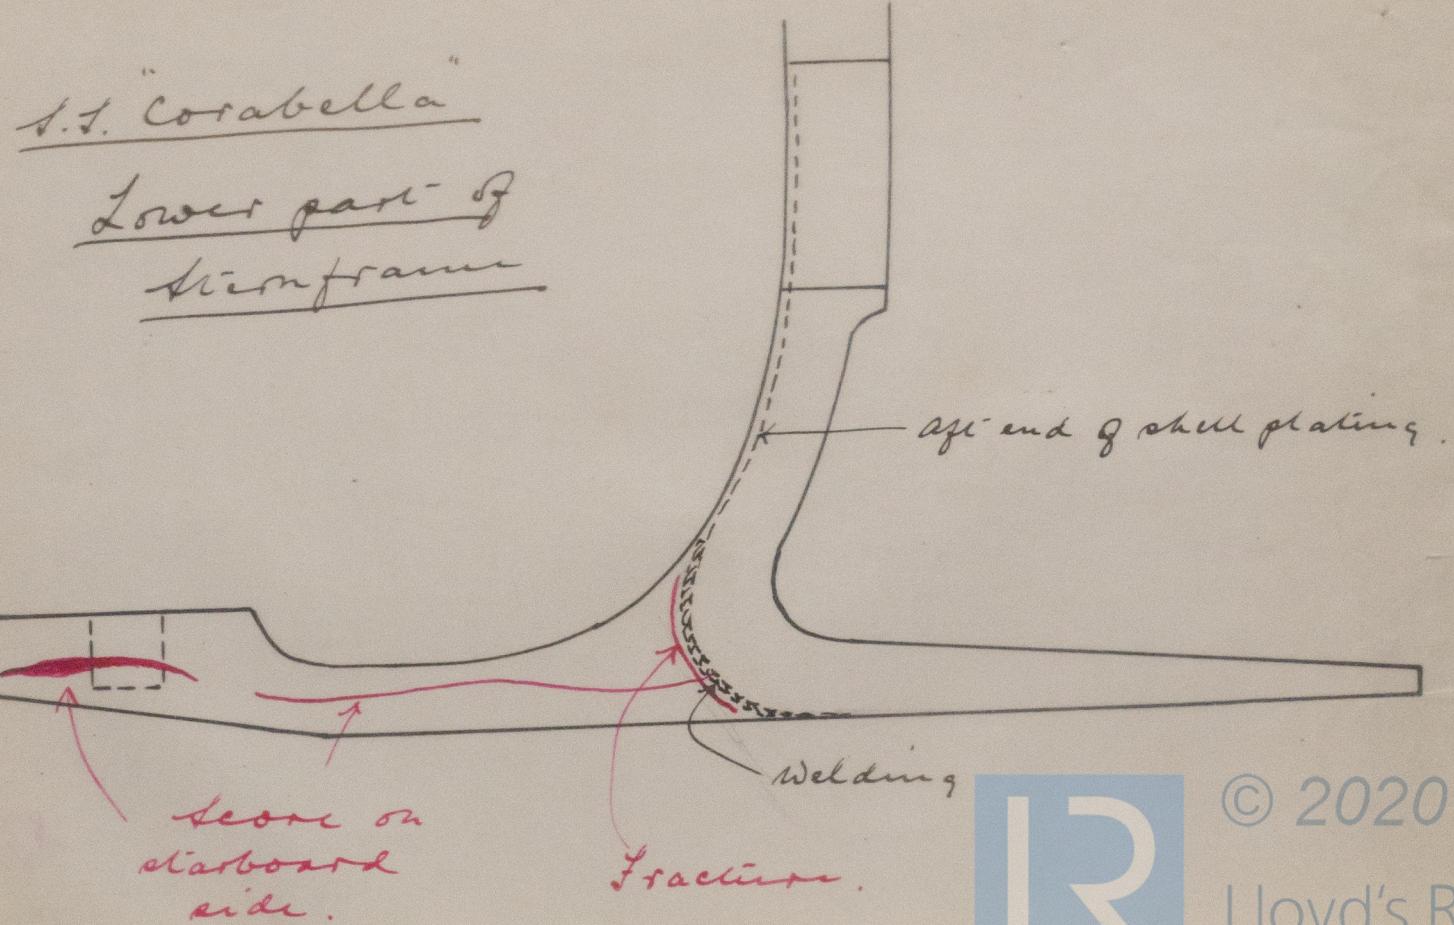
DETAIL OF BUSH IN STERNFRAME HEEL GLIDGON
